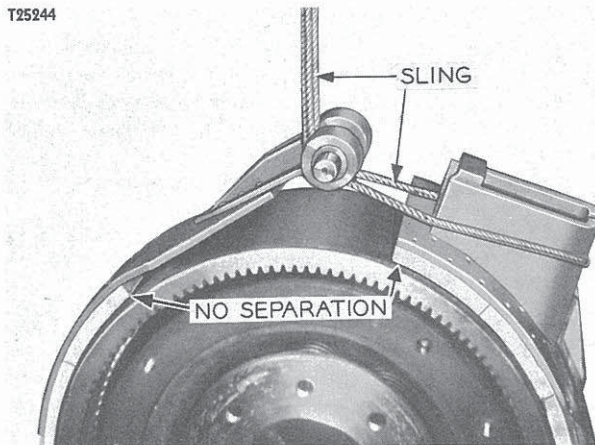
Slings for removal of steering clutch assemblies must be correctly attached as shown.
